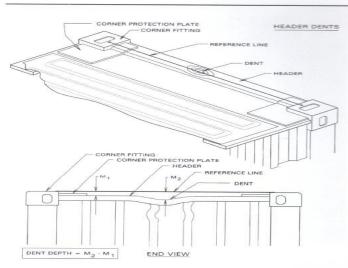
/Measuring damage to top header when corner protection plates prevent placing reference line over full length of header. See Section 4.2.4.
